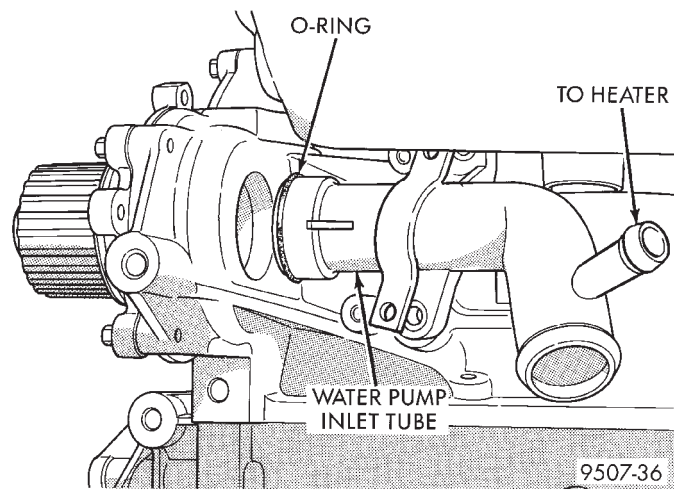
Water Pump Inlet Tube —Service WATER PUMP—3.0L ENGINE
